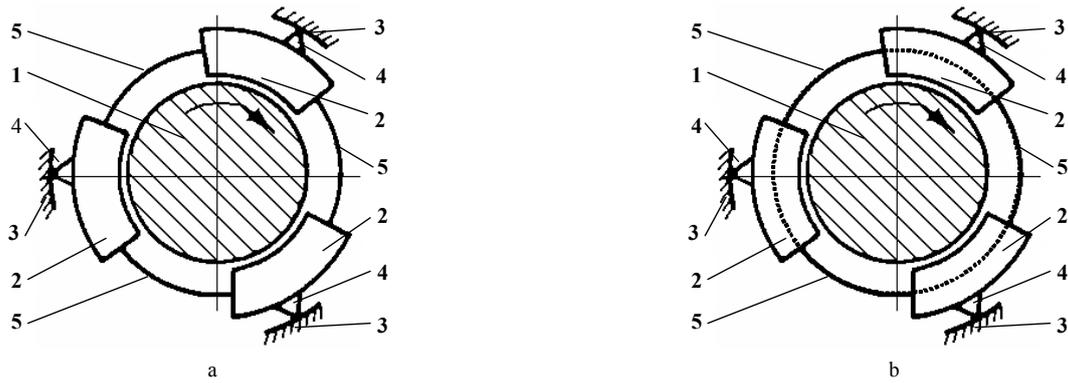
Adaptive hydrodynamic bearings: a – elastic shoulders that are connected segments: 1 - rotor, 2 – segments 3 - spindle head 4 - adaptive thrust; 5 - elastic shoulders that are connected segments; b – with elastic ring that is moved easily and is connected segments: 1 - rotor, 2 – segments 3 - spindle head 4 - adaptive thrust, 5 - elastic ring
